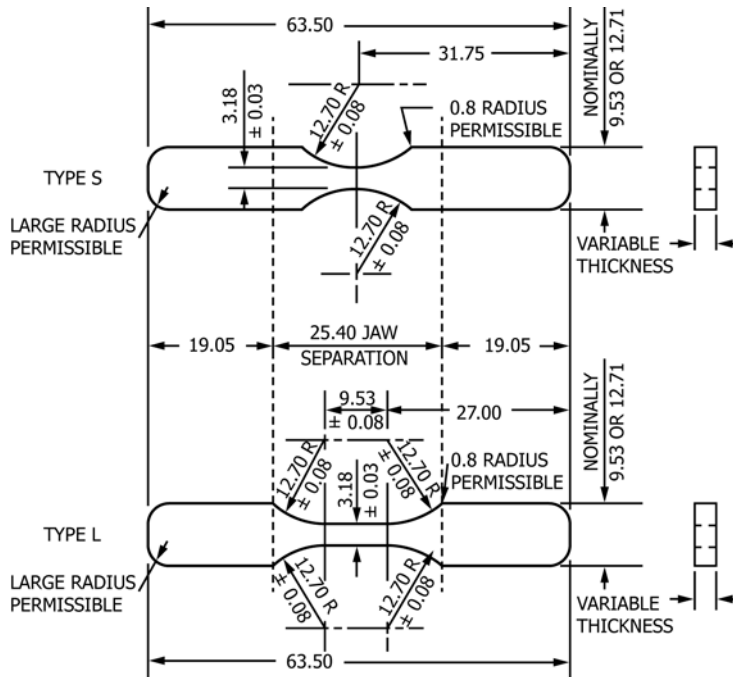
A Mold Dimensions of Types S and L Tension-Impact Specimens (Dimensioned in Millimetres)
